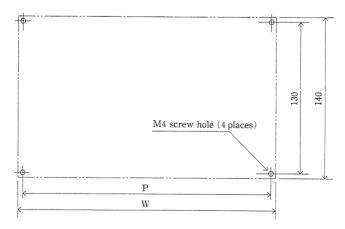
Mounting Holes of Basic Unit and Expansion Unit
